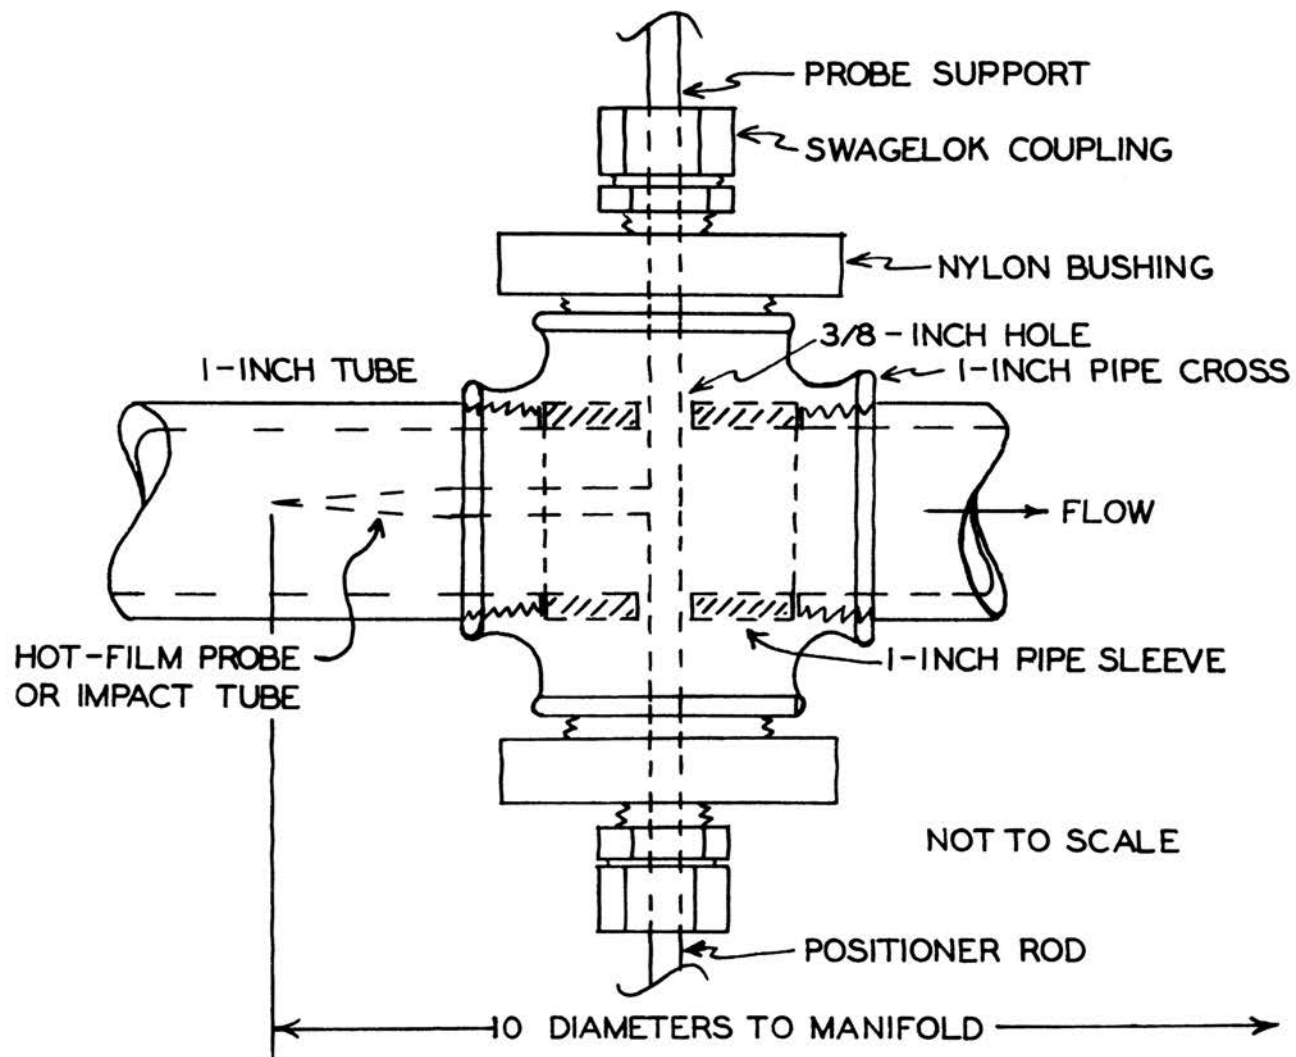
PROBE MOUNT FOR 1-INCH TUBE
